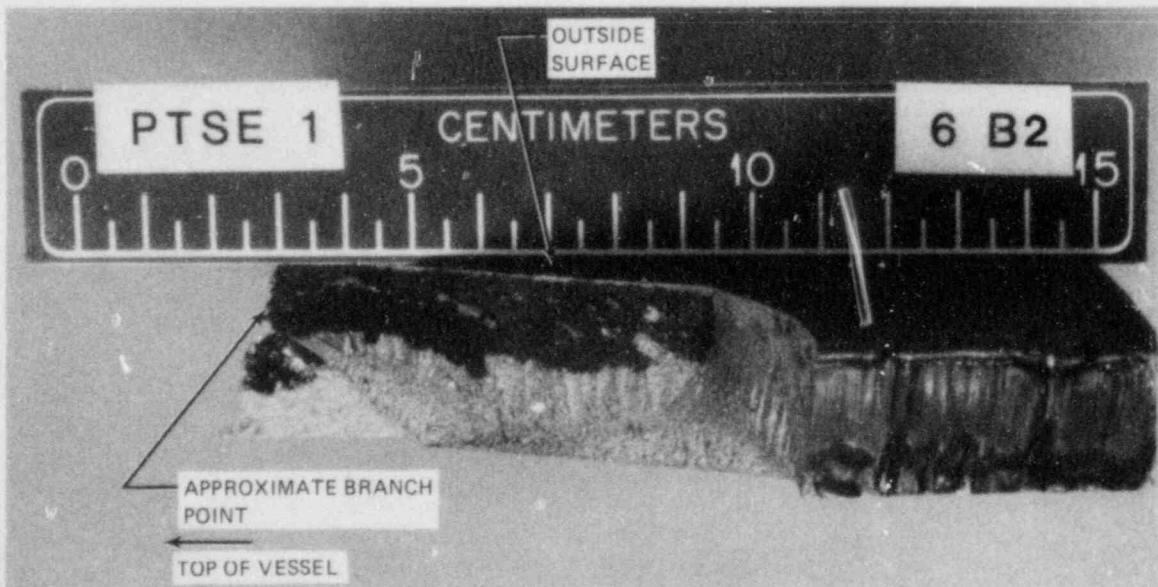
Fracture surface B of branch 2 in segment 6 of PTSE-1 flaw. This crack extension occurred only during first crack jump, which was in PTSE-1B transient. (See Fig. 10.3 for key to location.)
